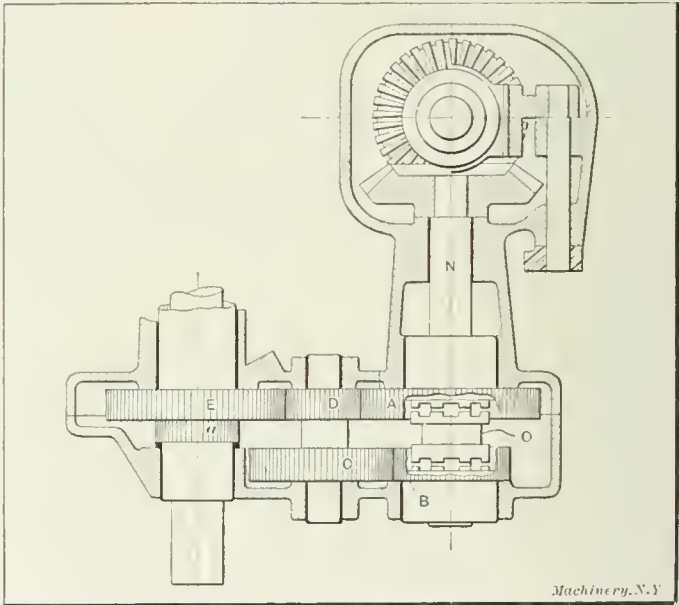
Transverse Section showing Drive to Spindle and Back Gears
